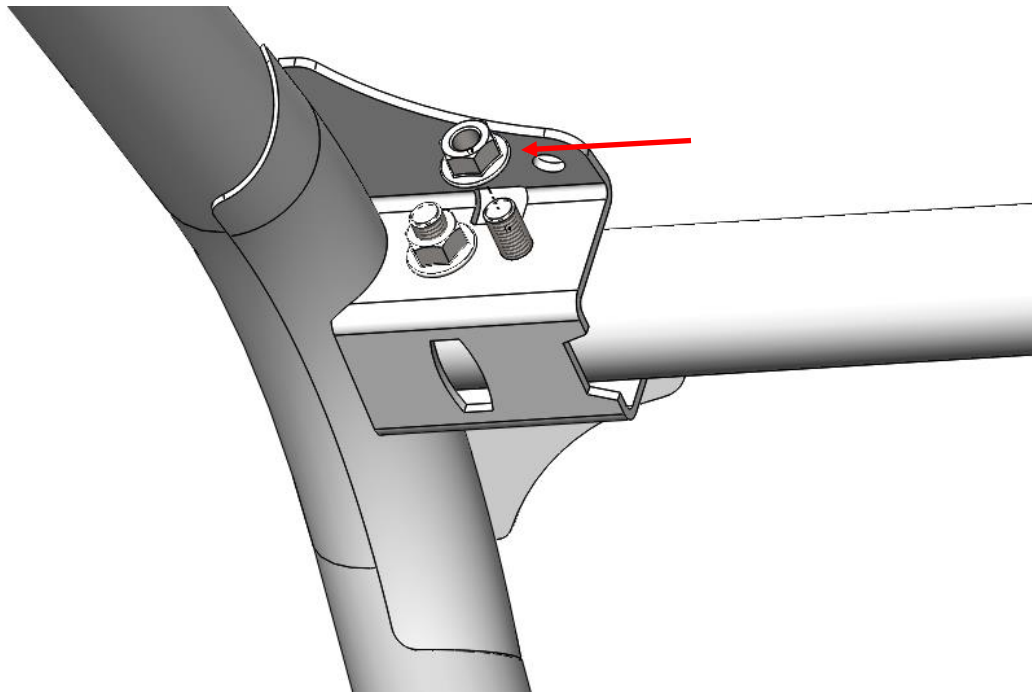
Remove the factory cross member nut. Driver side shown. (Passenger side similar)
